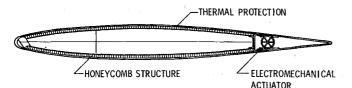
Single-layer honeycomb wing design with separate thermal protection.
